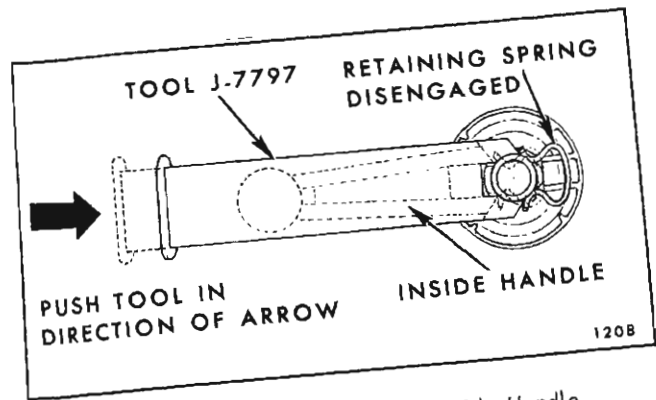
D12—Disengaging Door Inside Handle Retaining Spring
